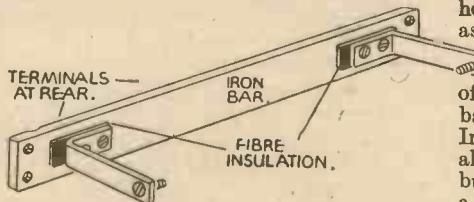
The brass brackets are fixed to an iron bar with insulating bushes.
